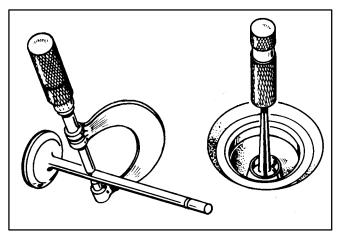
VALVE STEM AND VALVE GUIDE BORE DIAMETERS
